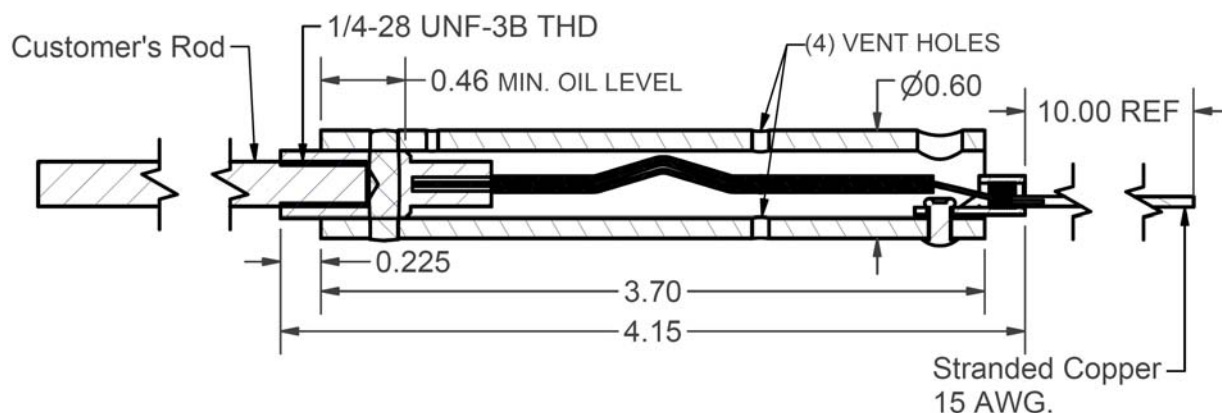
Outline drawing of the 8.3kV/15kV Oil-Immersed Weak Link Bushing Mounted Fuses
